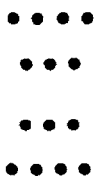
Full-size drill template for mounting 14-lead integrated circuits on printed-circuit board.
